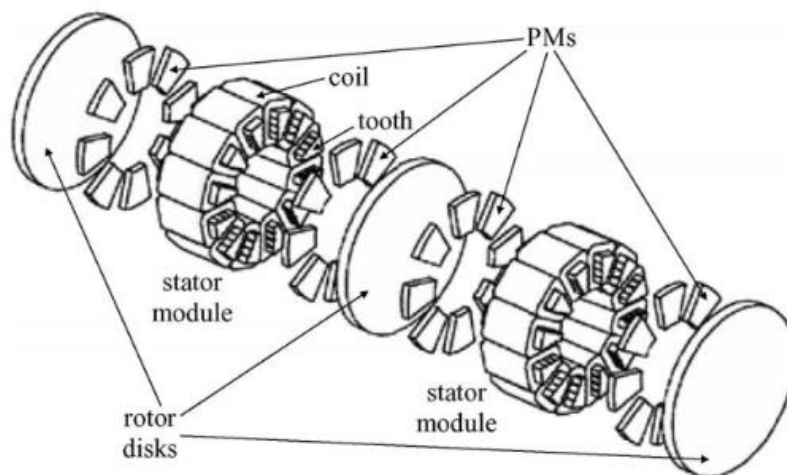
Exploded sketch of a portion of the a three stage AFPM machine
